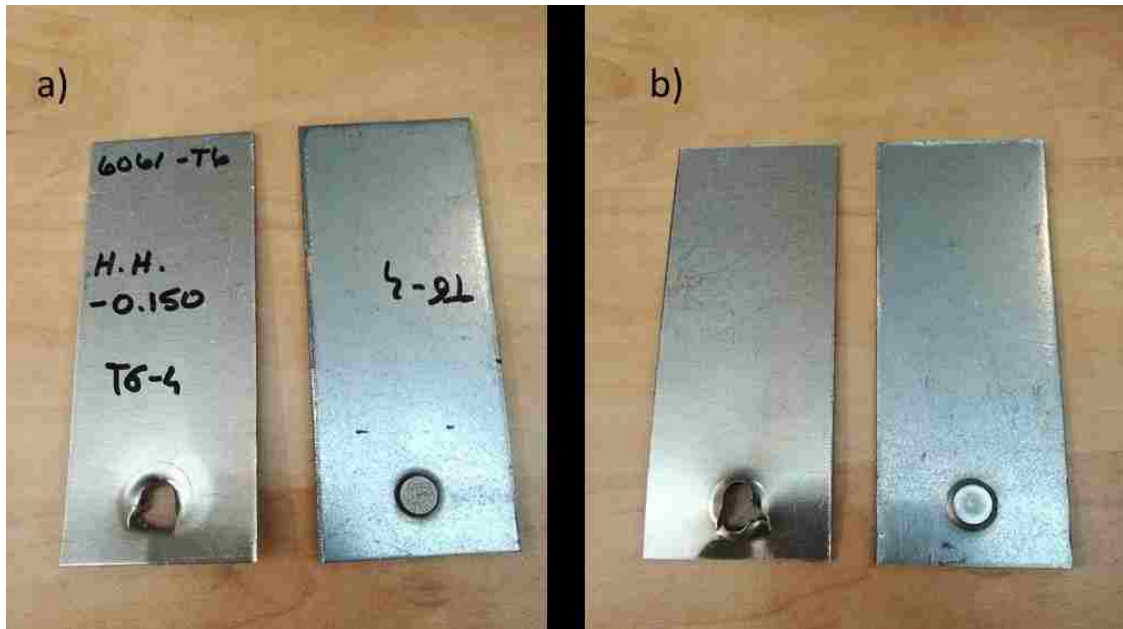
SPR joints after Lap Shear test (Quiet Aluminum® with 6061-T4 skin after 1 h at 200°C and HSLA steel).
